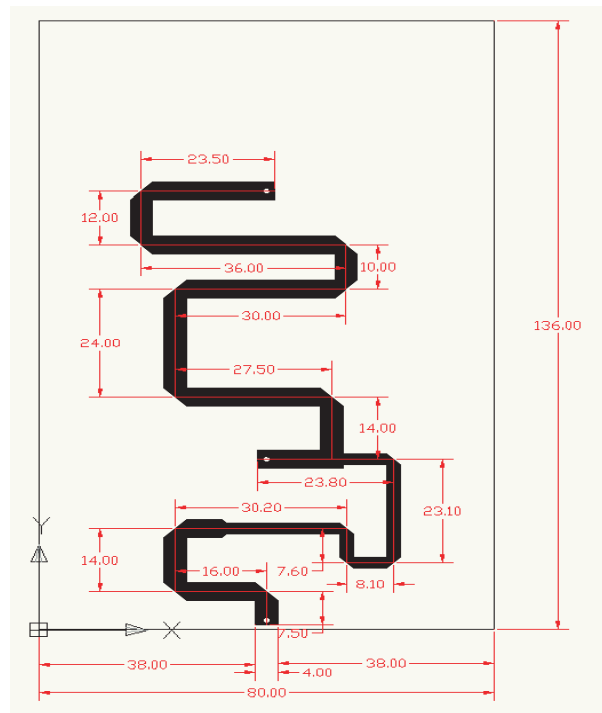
Micro-strip antenna beneath the FR4 PCB board.
